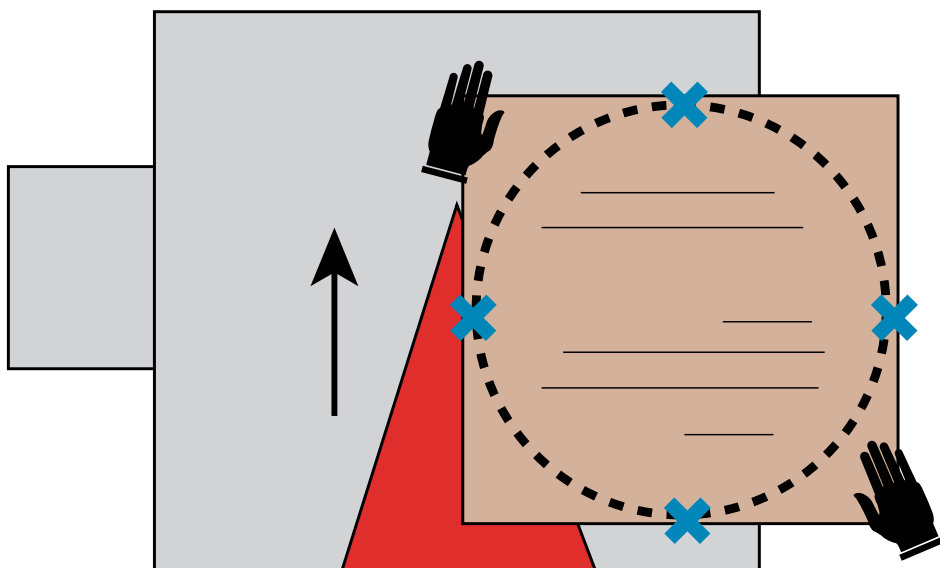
Position your left hand behind the sawblade and your right hand outside the danger zone as you cut a bowl blank. The Xs represent the four places where the blade will exit the wood, potentially making the bowl blank jump forward.
